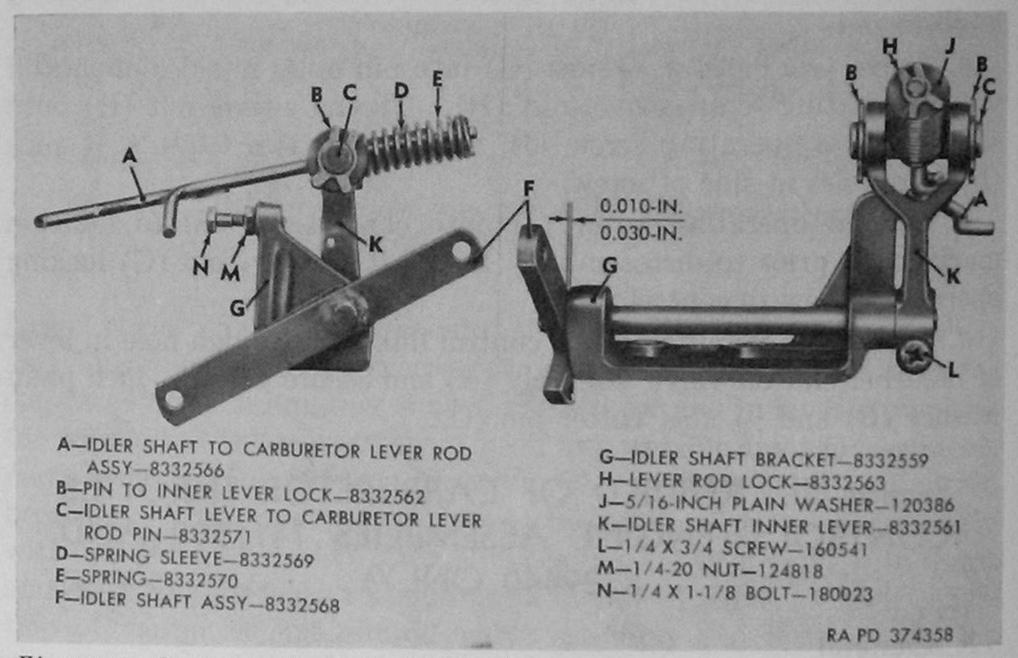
Carburetor throttle control bracket assembly—engine assembly 8329440 and late engine assembly 7411599.
